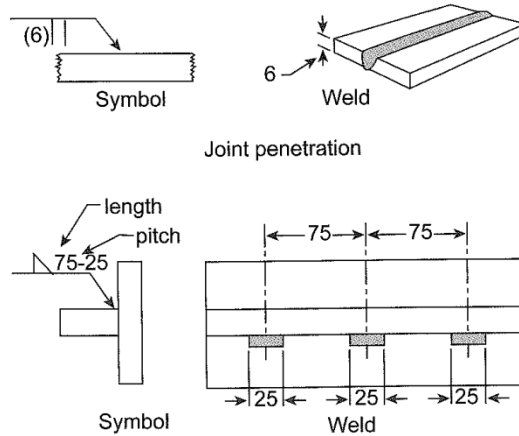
Applications of dimensions in the welding symbol
